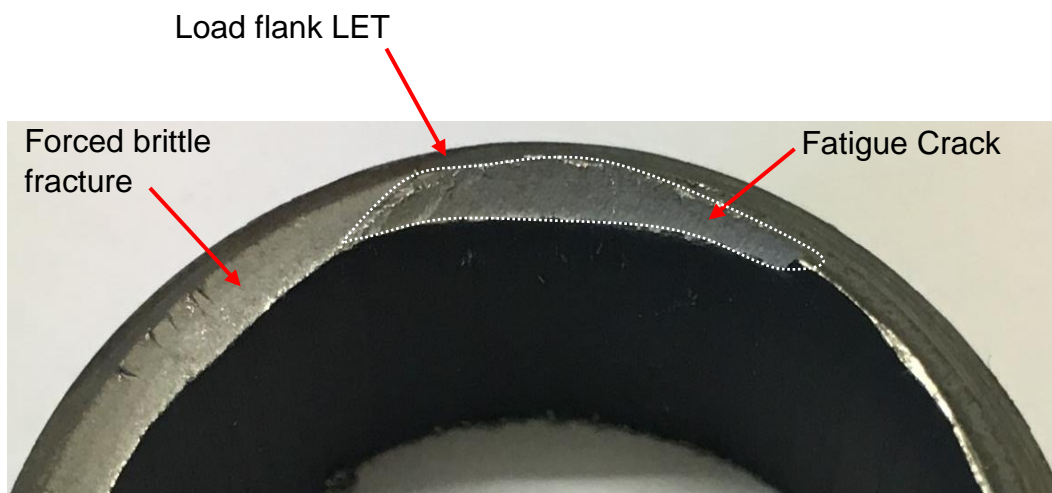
Fracture surface of a fatigue crack in a 1" API Line Pipe specimen.
